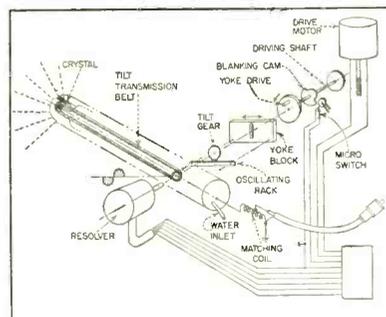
Mechanical details shown by the exploded view of the sector-scanning crystal applicator
